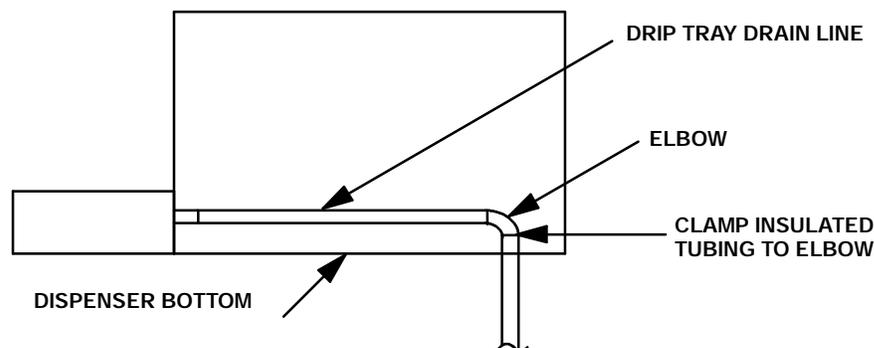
DRIP-TRAY DRAIN ASSEMBLY FOR BOTTOM HOOK-UP
